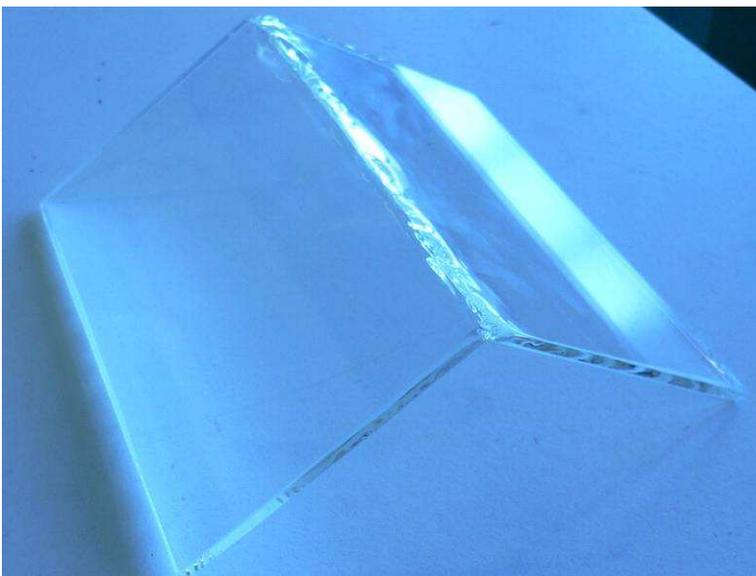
Sample with fused glass plates using joint filler on perpendicularly polished edges
